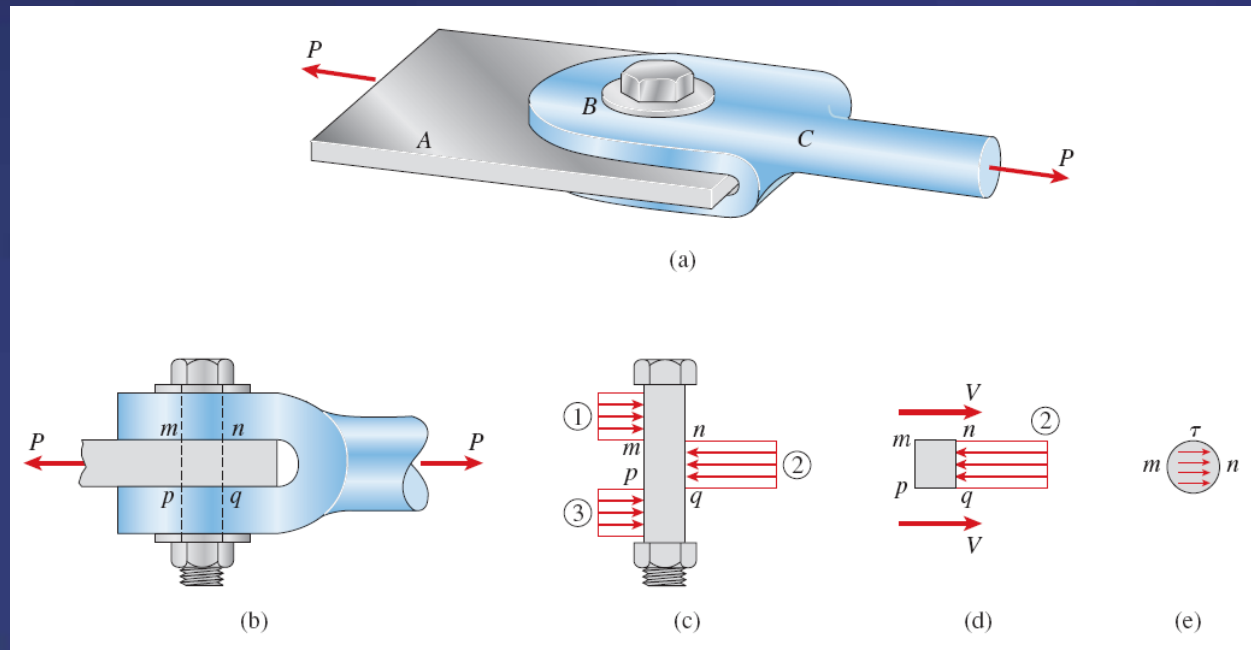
Bolted connection in which the bolt is loaded in double shear
